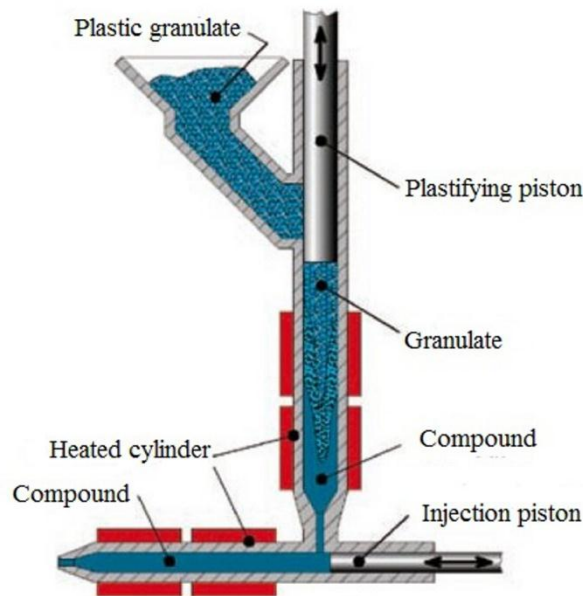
Plasticization and injection unit of formicaPlact® microinjection molding machine (adapted from [28])
